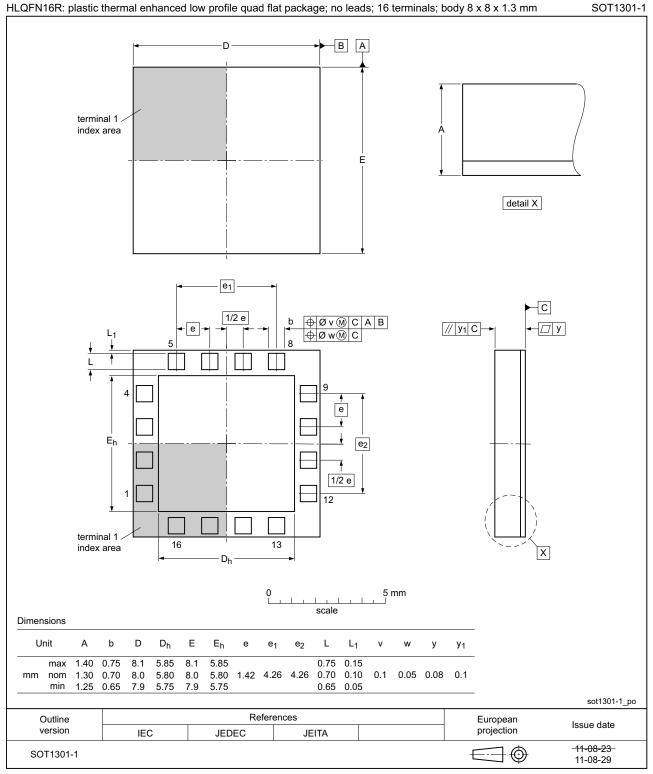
Package outline SOT1301-1 (HLQFN16R)
